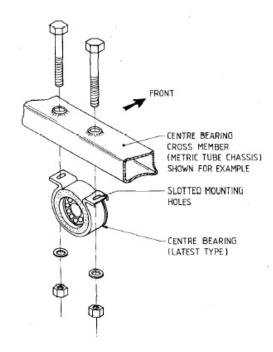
Centre Bearing Housing Longitudinal Mounting Slots
